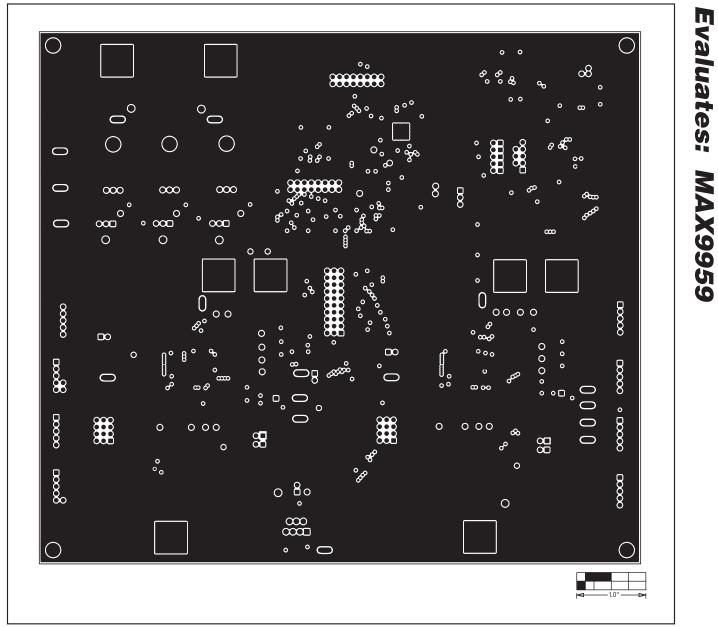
MAX9959 EV Kit PCB Layout—2nd Layer
